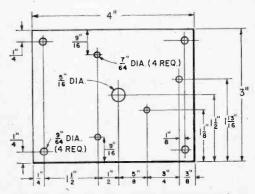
Relay and motor are mounted on this insulating panel, which is mounted over the commutator board, as in Fig. 7.
